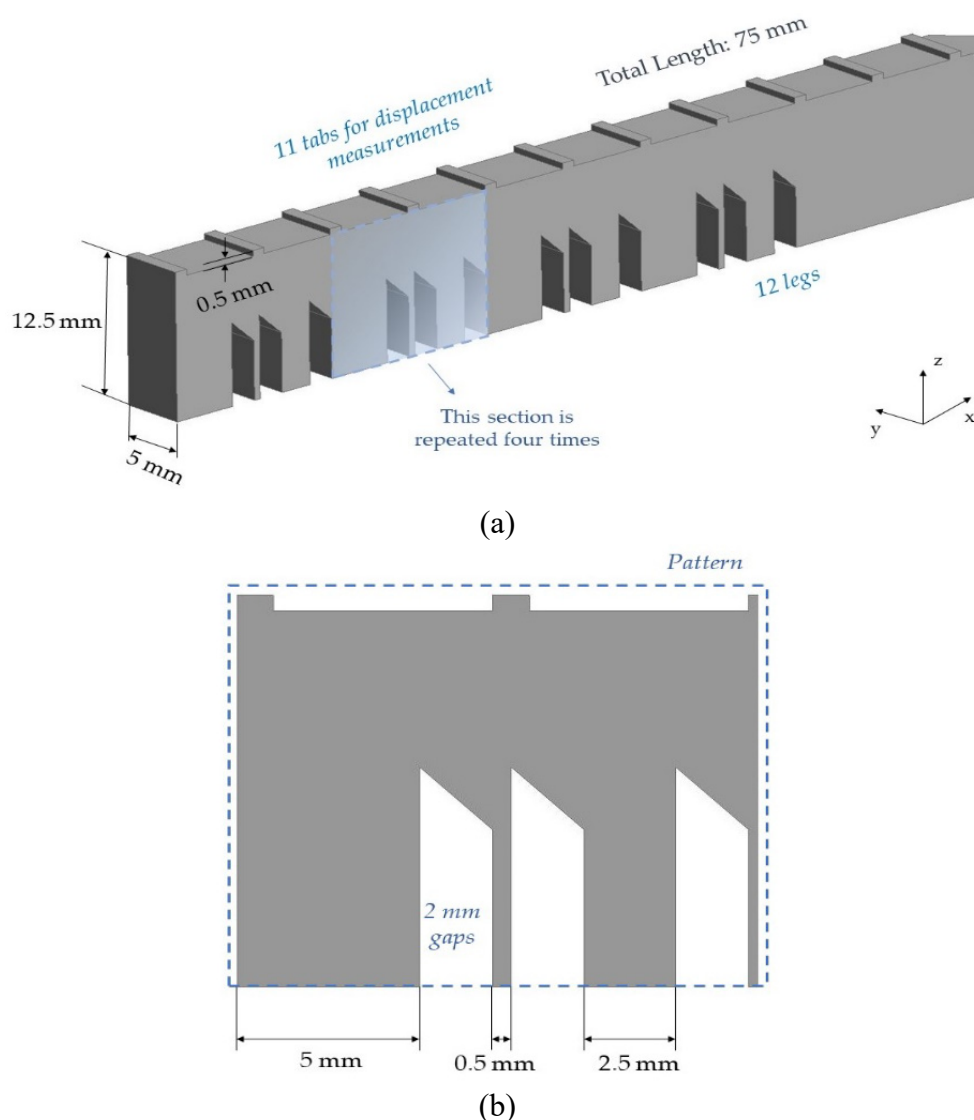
Geometry and dimensions of IN625 single cantilever beam: (a) isometric view and (b) pattern details [35].
